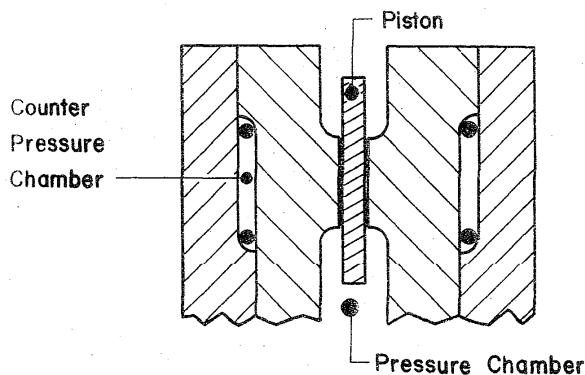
Geometry of controlled-clearance gage showing counter pressure chamber.
